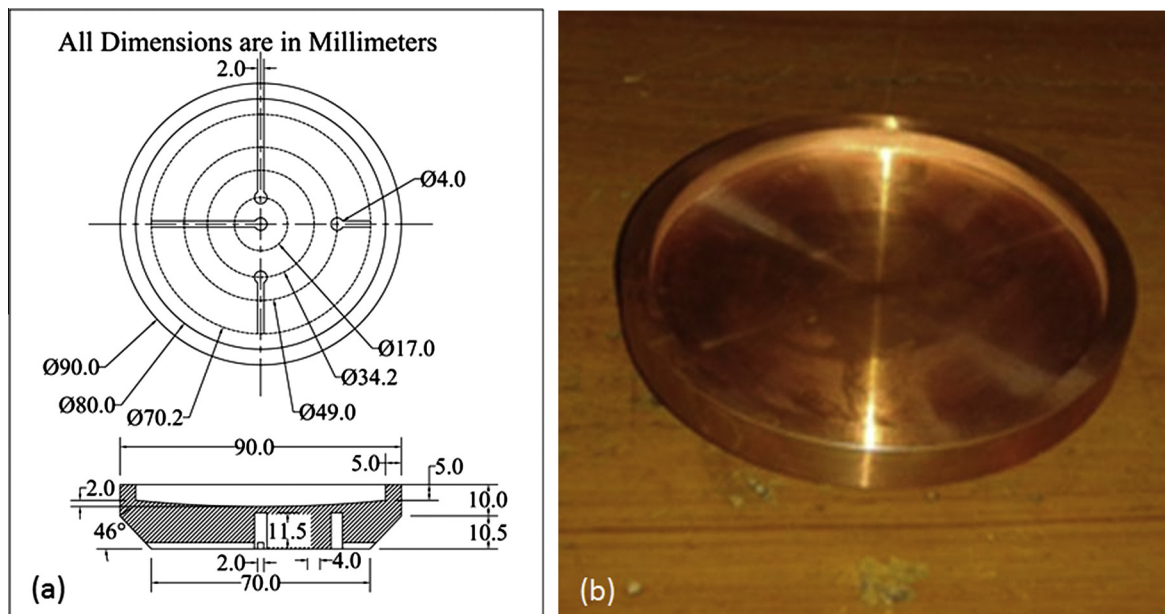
(a) Schematic and (b) photographic view of the copper block.
